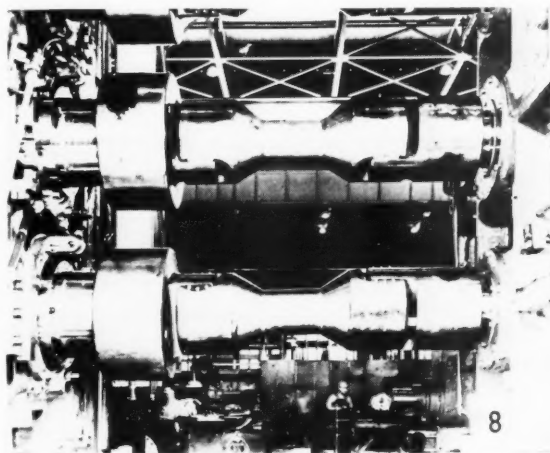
Typical Universal Bearings for Driving Calender Rolls Equipped for Cross Axes Adjustment
